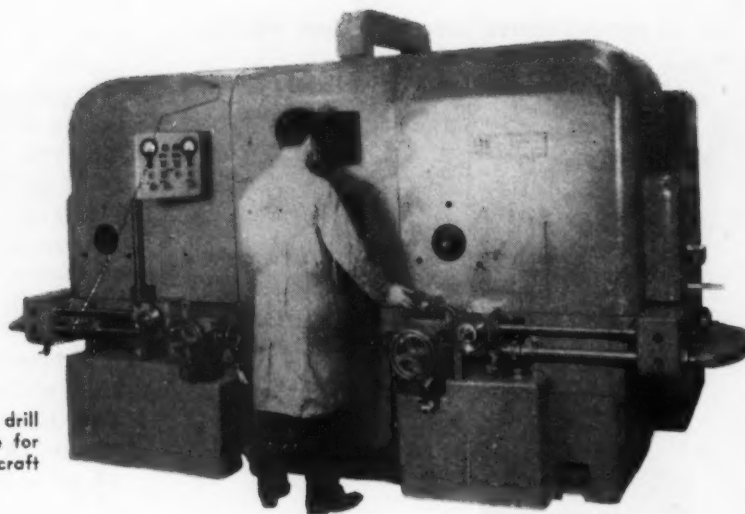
Crush grinding threads of oil well drill bits lead to the development of this machine for grinding the Christmas tree dovetails in aircraft gas turbine buckets to ± 0.002 in tolerances.
